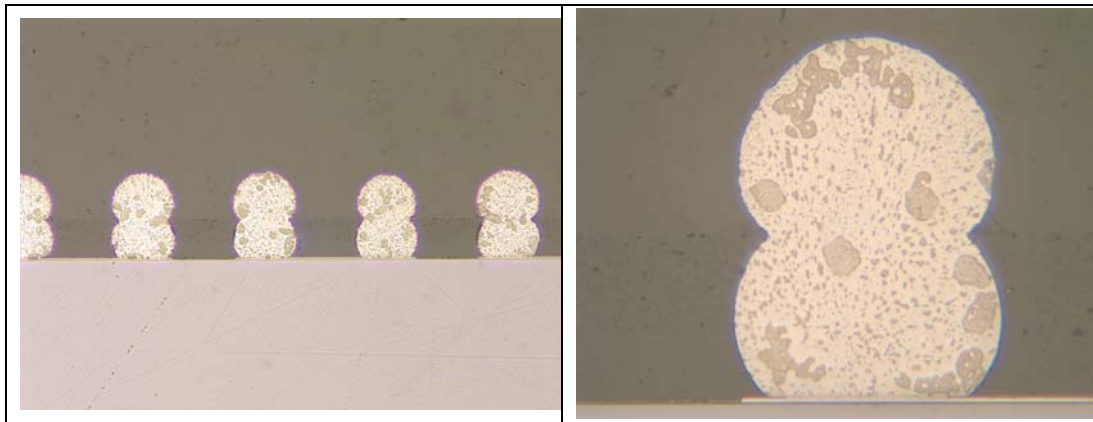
Cross-section of the double bumped solder ball after bumping with total bump height of 6.68mil
